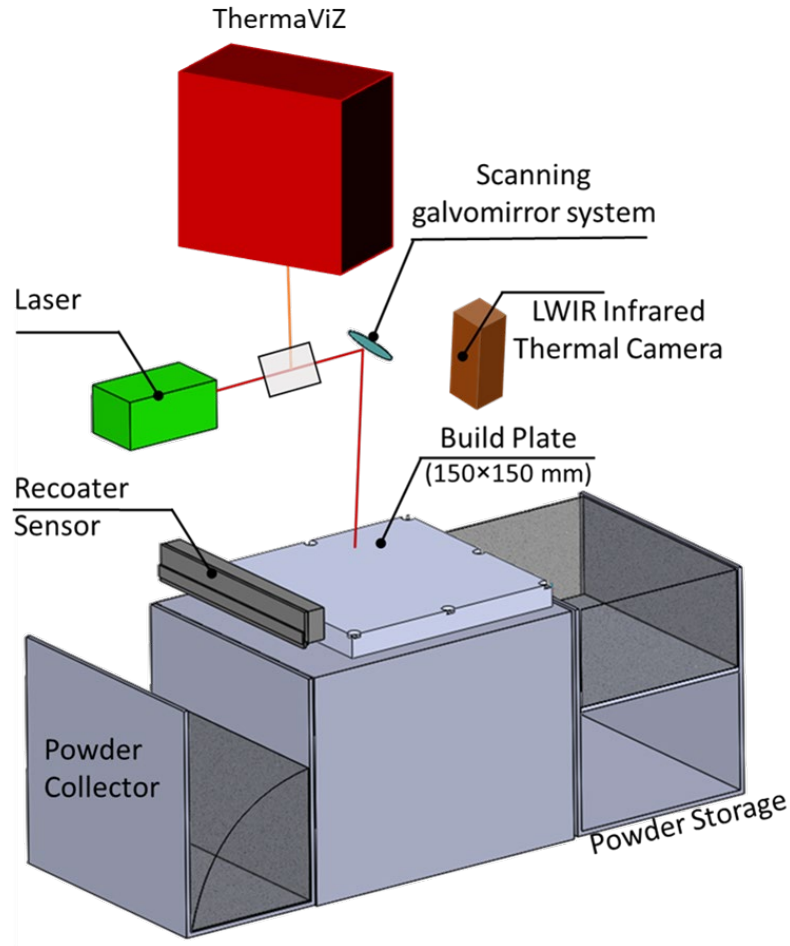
Schematic of the sensor positions in the Edison Welding Institute's open architecture machine. The infrared camera was mounted inside the build chamber, the ThermaViz sensor was mounted co-axially with the laser beam, and the recoater sensor was integrated with the machine's recoater.
